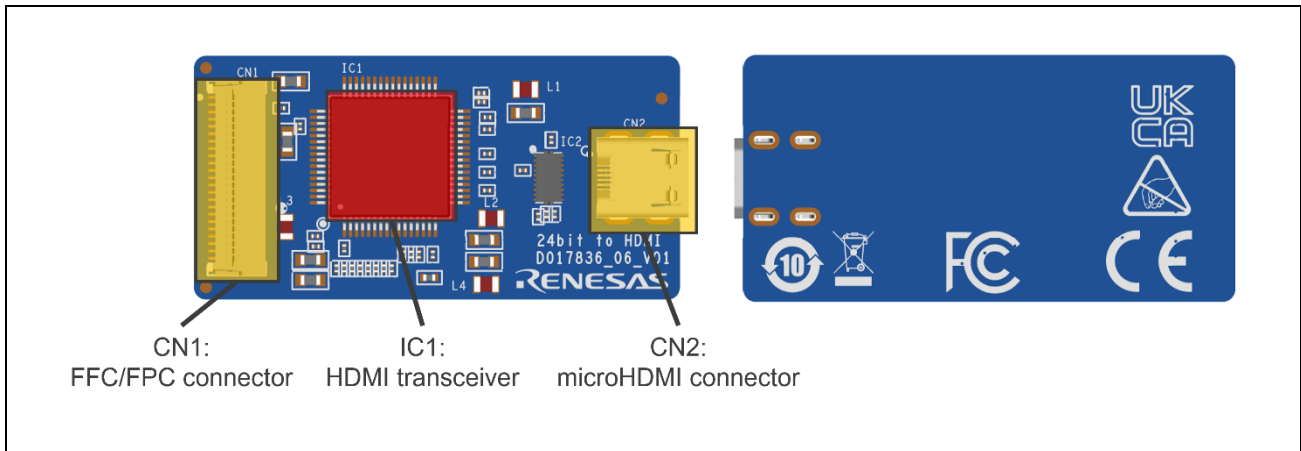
Layout of Components of the Parallel to HDMI Conversion Board (Top and bottom View)
